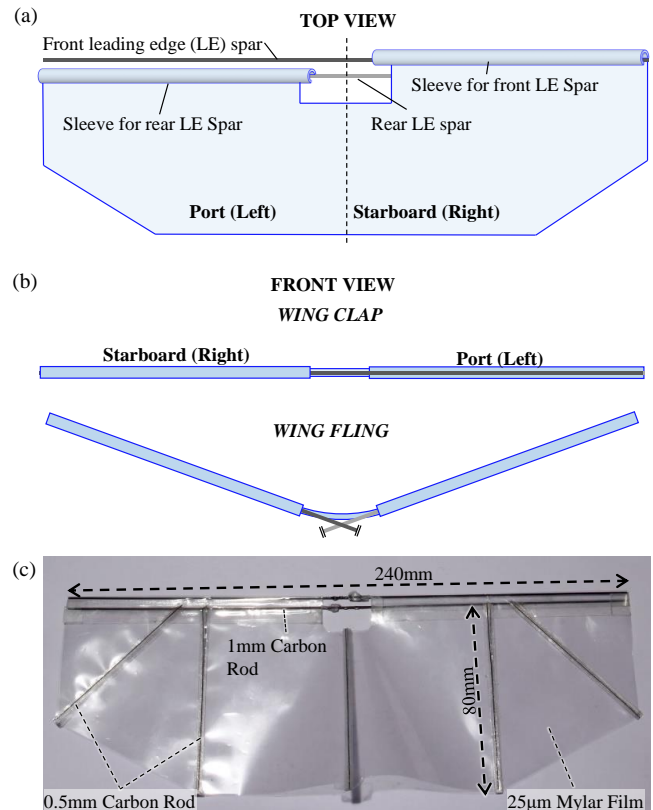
(a) Top view of the top wing foil design. Front LE spar is slotted into the starboard sleeve of the foil. Rear LE Spar is slotted into the port sleeve of the foil (b) Front view of the top wing foil when the wings clap and fling open. The top foil is folded to a V-shape by the LE spars. (c) X-wing with two overlapping sheets of wing foils with reinforcement spars.
